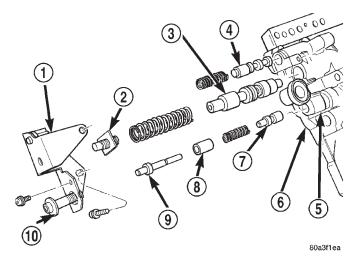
Adjusting Screw Bracket, Springs, and Valves
